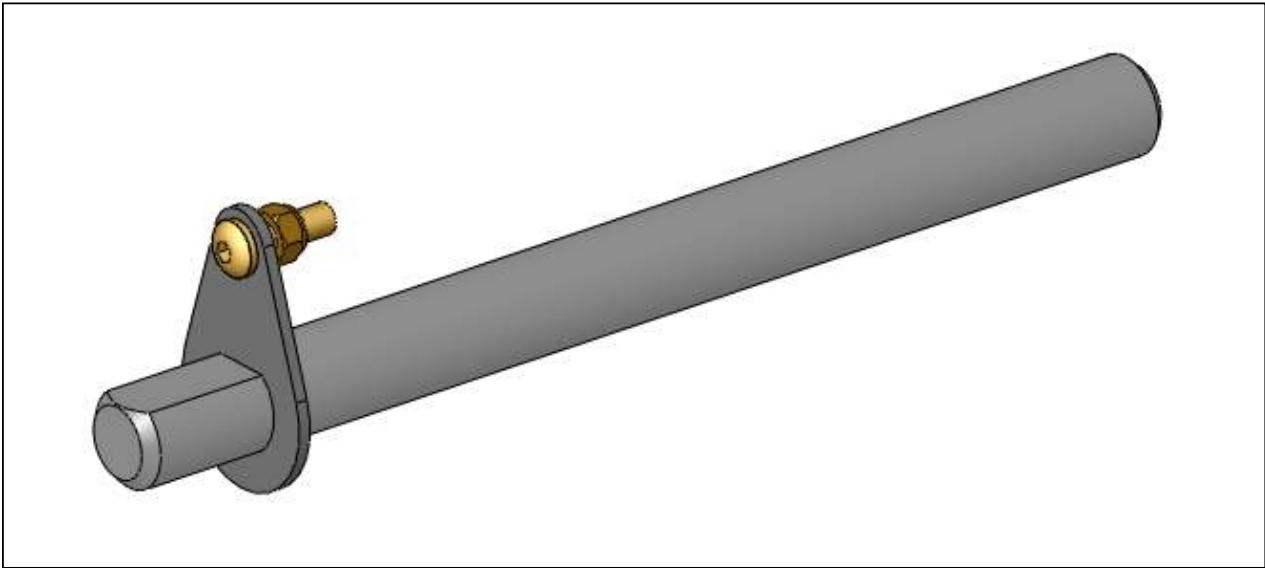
Type 4 axle retrofit kit used to stop the axle rotating for Type 2 hubs, order part # 110030 - HUB AXLE EDGE XT TYPE 4 RETRO KIT
